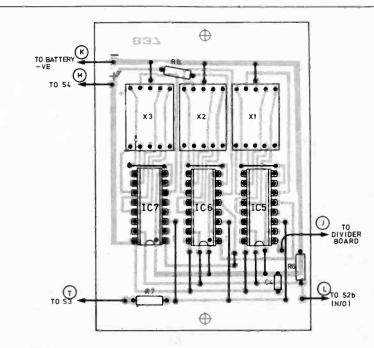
Display printed circuit board component layout and full size copper foil (opposite) master pattern.
